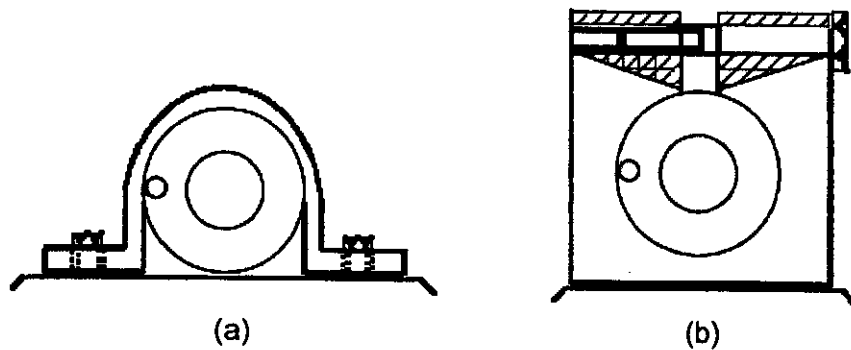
Head-on View of LVDT Mounting Methods. (a) Bracket, (b) Mounting Block.
